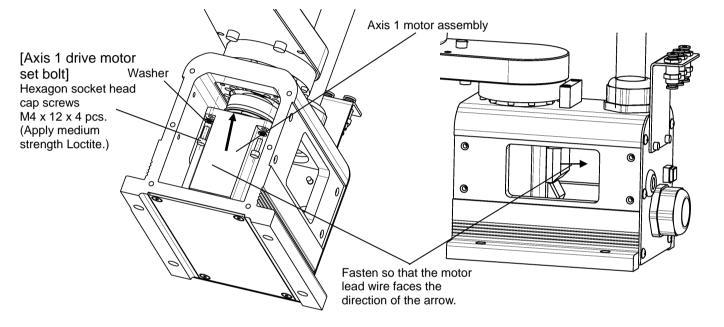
Mounting axis 1 motor assembly (KHL-300, KHL-400)
